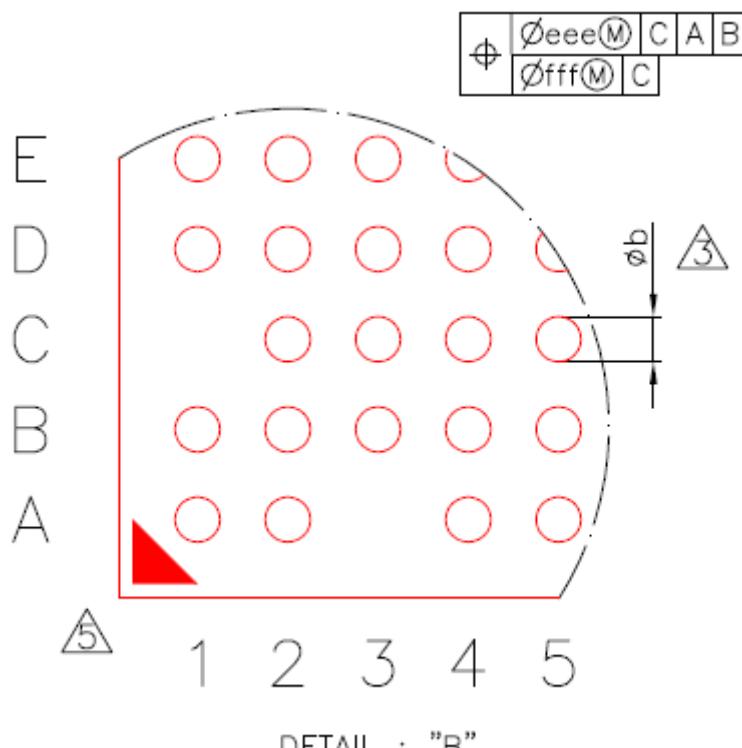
RK3368 TFBGA453 Package Bottom View
